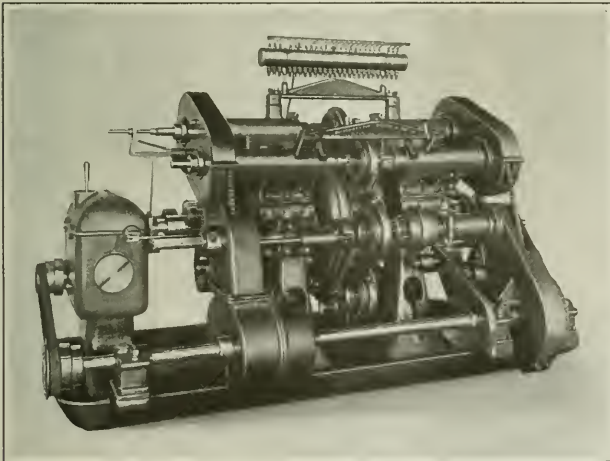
Rear View of Blomquist-Eck Duplex Multi-spindle Turret Machine
